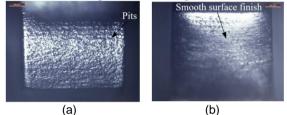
Microscopic image of gear involute profile (a) before and (b) after finishing
